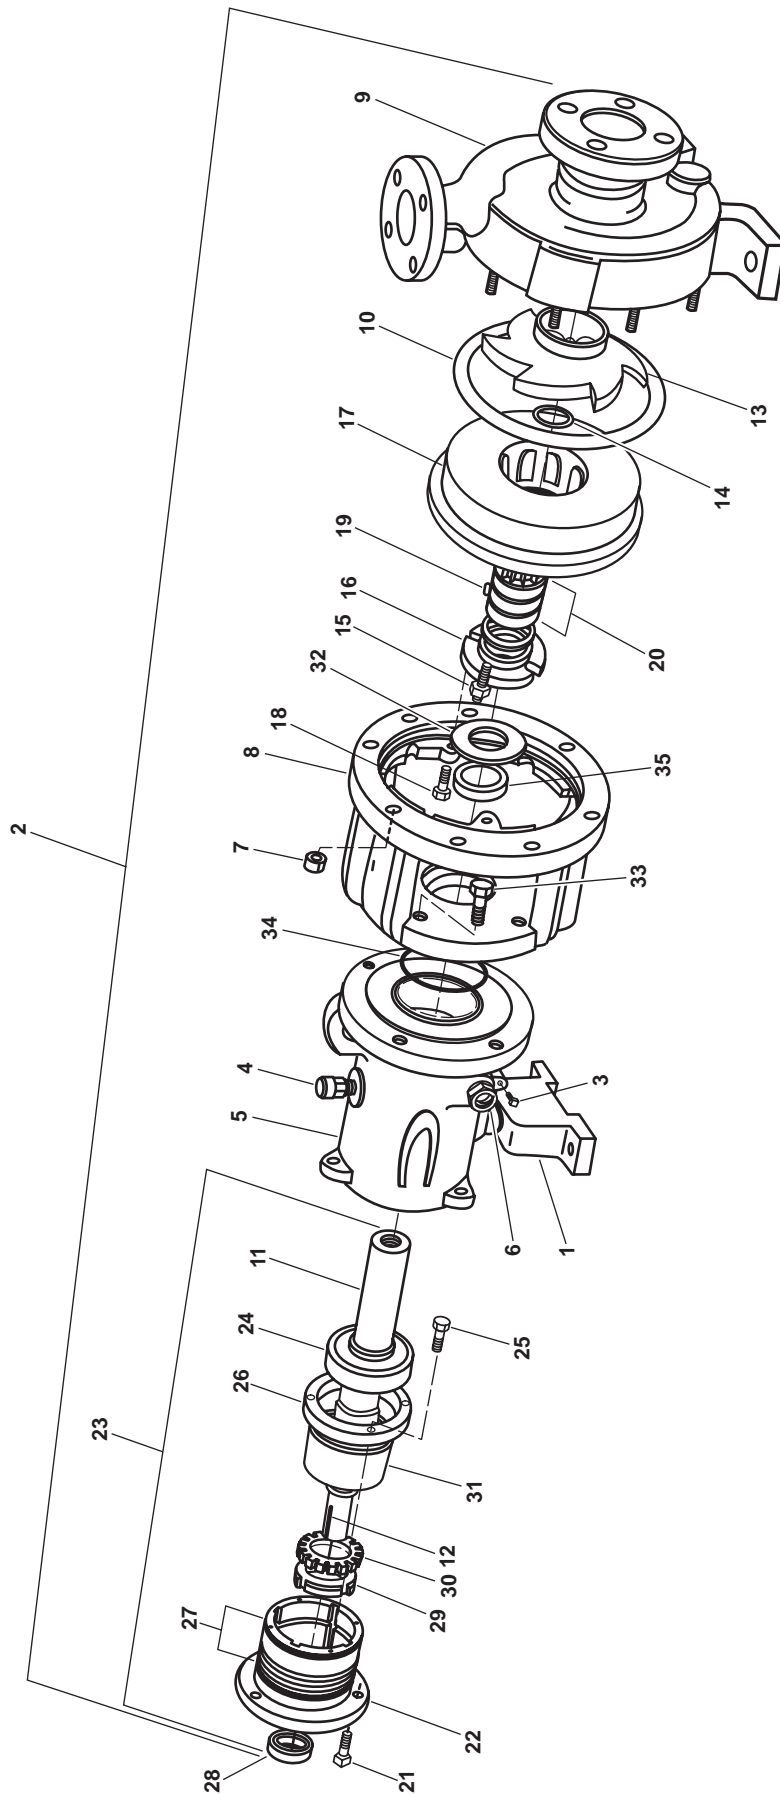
Diesel Engine-Driven Firefighting Pump Assembly
